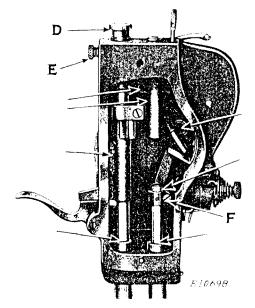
End View of Machine, Showing Oiling Points, also Adjustments on the Machine
